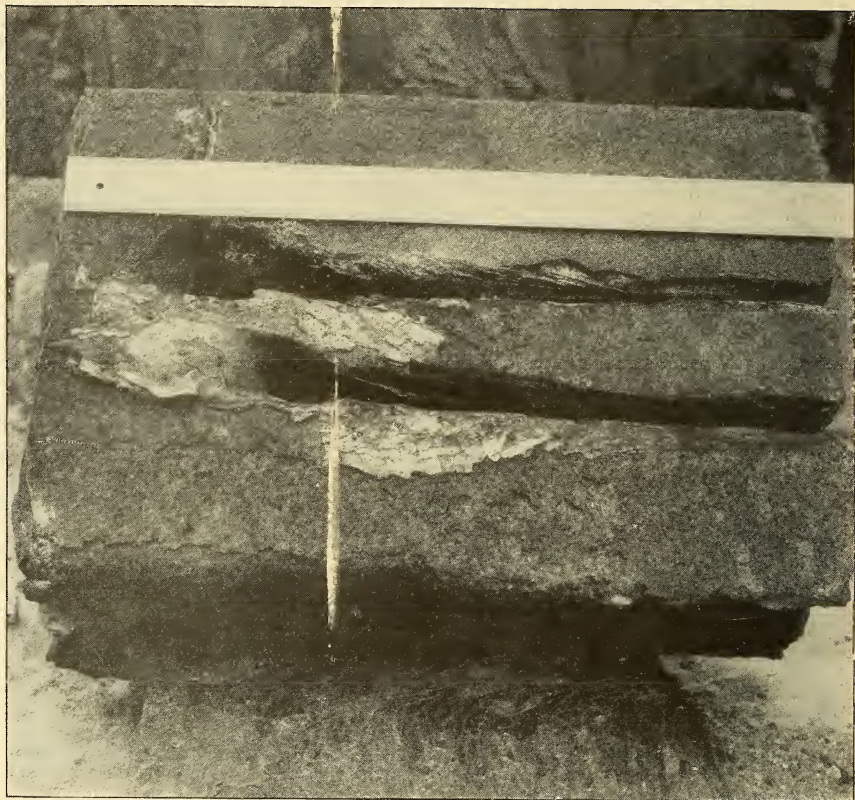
Oxyacetylene cut on 16-inch steel showing failure of cut at depth of 12 inches
